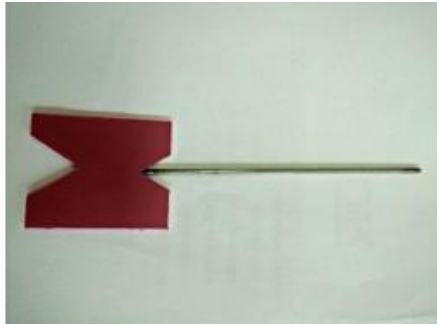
1 Tungsten electrodes visual inspection in measuring 30° and 60° angle.
